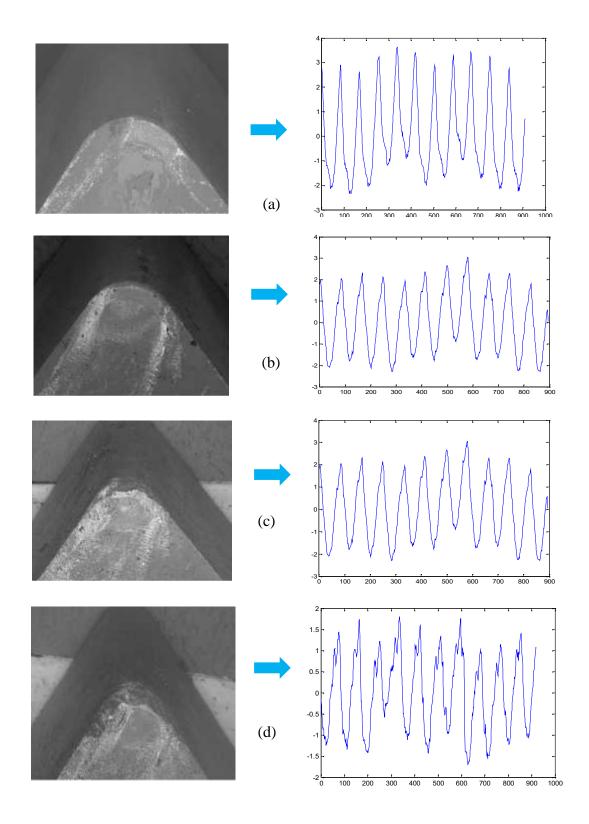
The close view of ceramic insert and their corresponding extracted subpixel profile (a) First machining (b) Second machining (c) Third machining (d) Fifth machining
